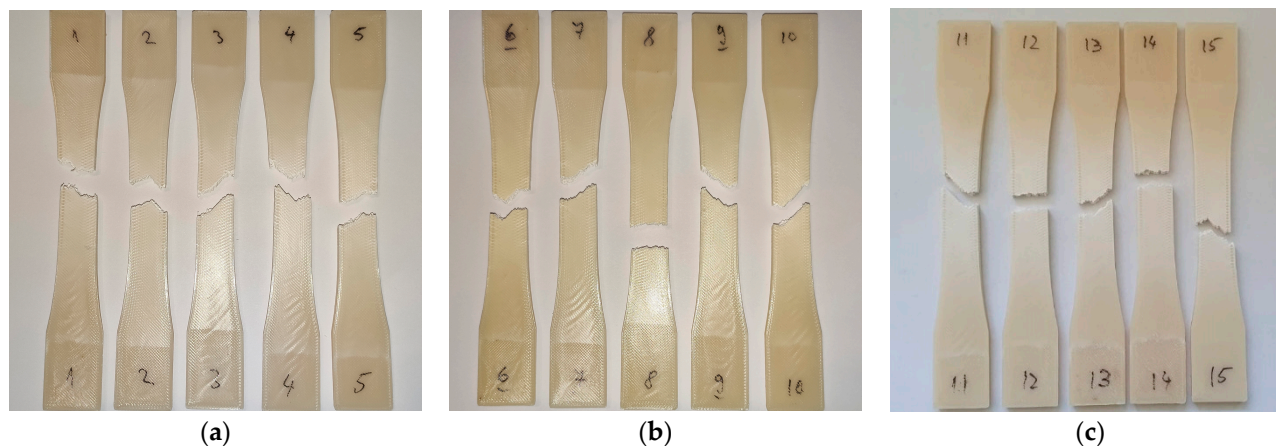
Fracture modes of tensile-tested parts: (a) Fractured ABS-PC parts from the control group; (b) Fractured ABS-PC parts exposed to UV-B; (c) Fractured ABS-PC parts exposed to UV-C.
